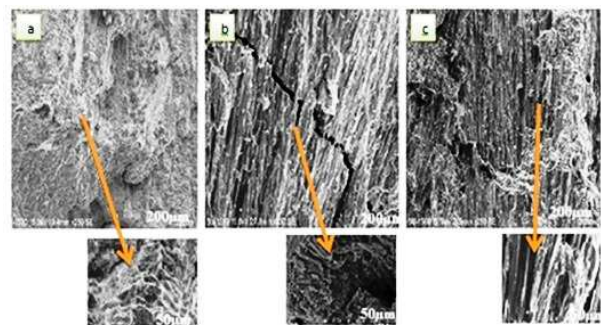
Fractured surfaces of shear specimens weld joint were welded by the composite tubular electrodes
